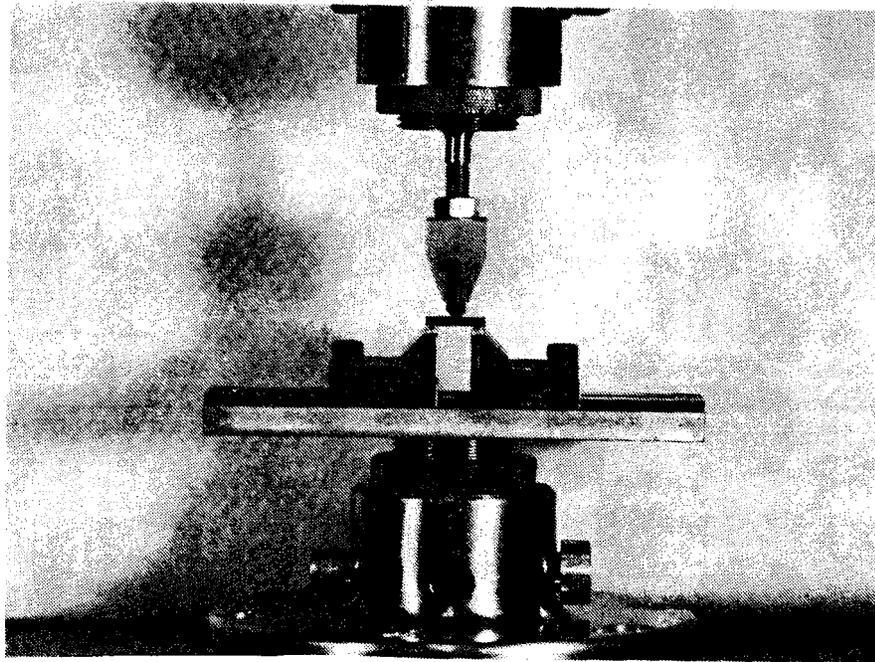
Three-Point Shear Fixture, Courtesy: D.F. Adams, University of Wyoming
